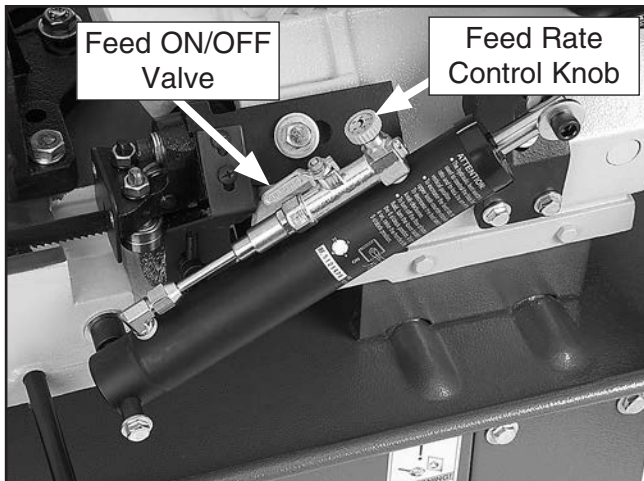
Location of feed ON/OFF valve and feed rate control valve.
